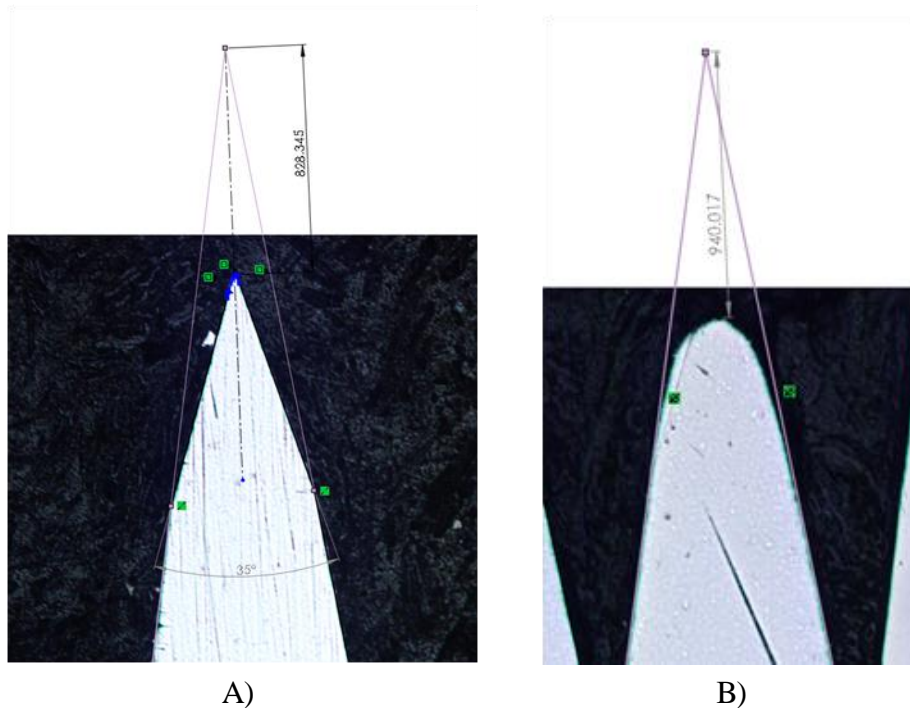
Measurement of depth of blade wear: A) New blade B) Used blade
